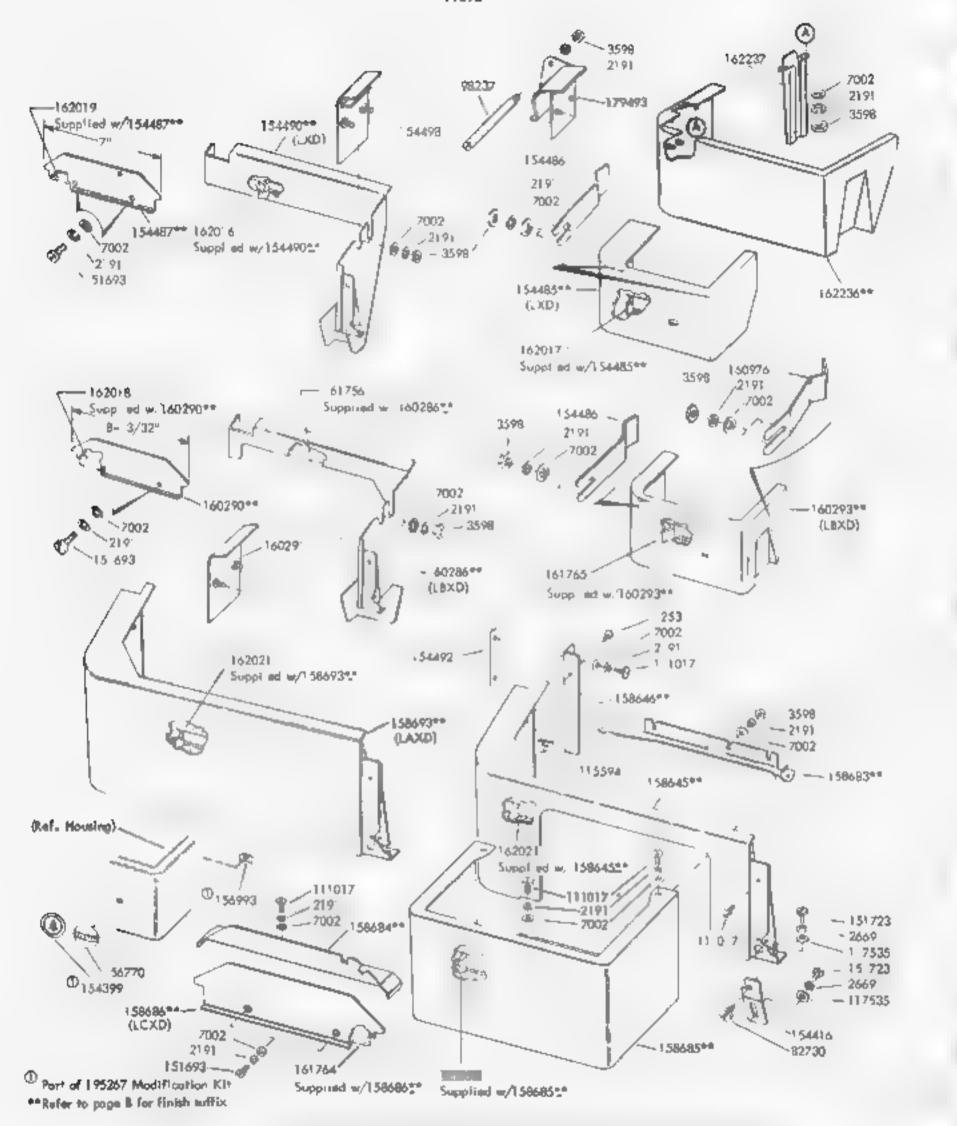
TRANSMITTER AND TRANSMITTER DISTRIBUTOR HOUSINGS
